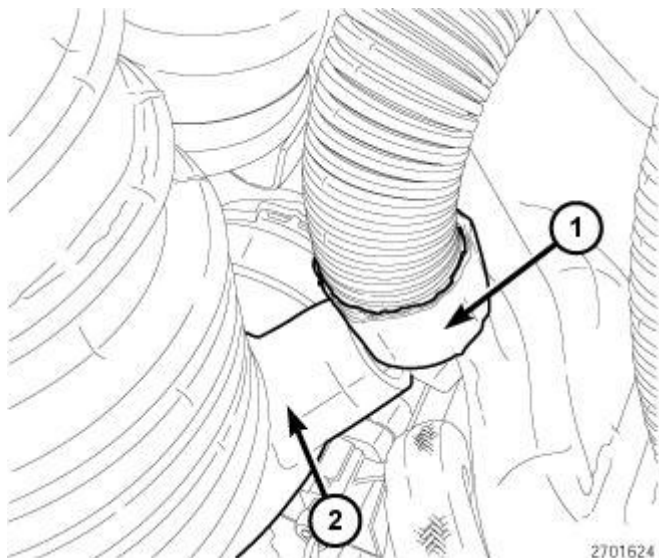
Identifying Air Cleaner Housing, Worm Clamp, Air Cleaner Outlet Tube, Maf Sensor & IAT Sensor
